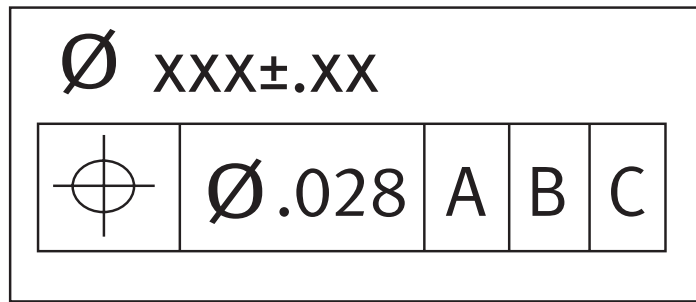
Codes look puzzling? This is an example of Geometric Dimensioning and Tolerancing.
